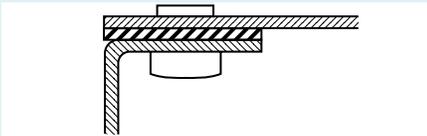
Insert Pressed-In and Flared Makes EMI Tight Joint (Alternate: Weld or Cement with Conductive Epoxy)
